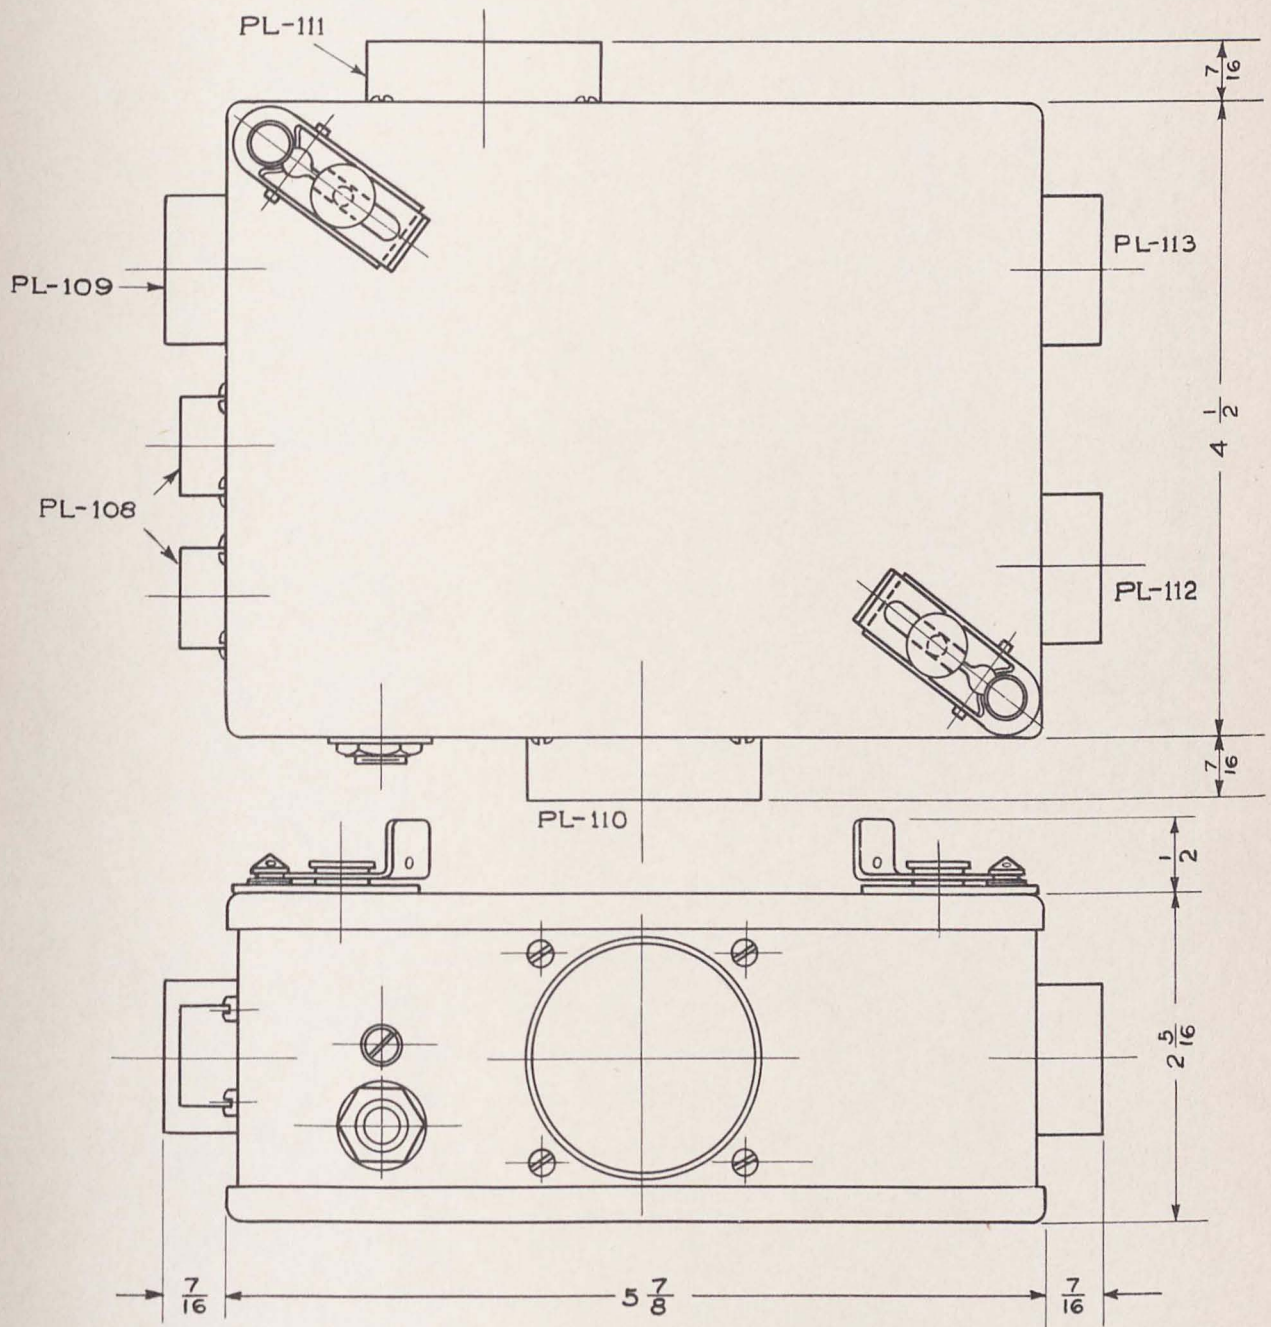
Junction Box TM-180-A, Outline Dimensional Drawing
